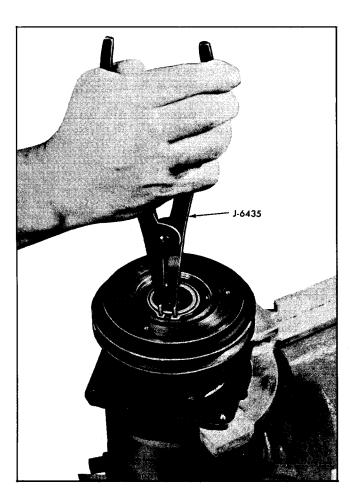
A-66 Removing Pulley and Bearing Assembly Retainer Ring
